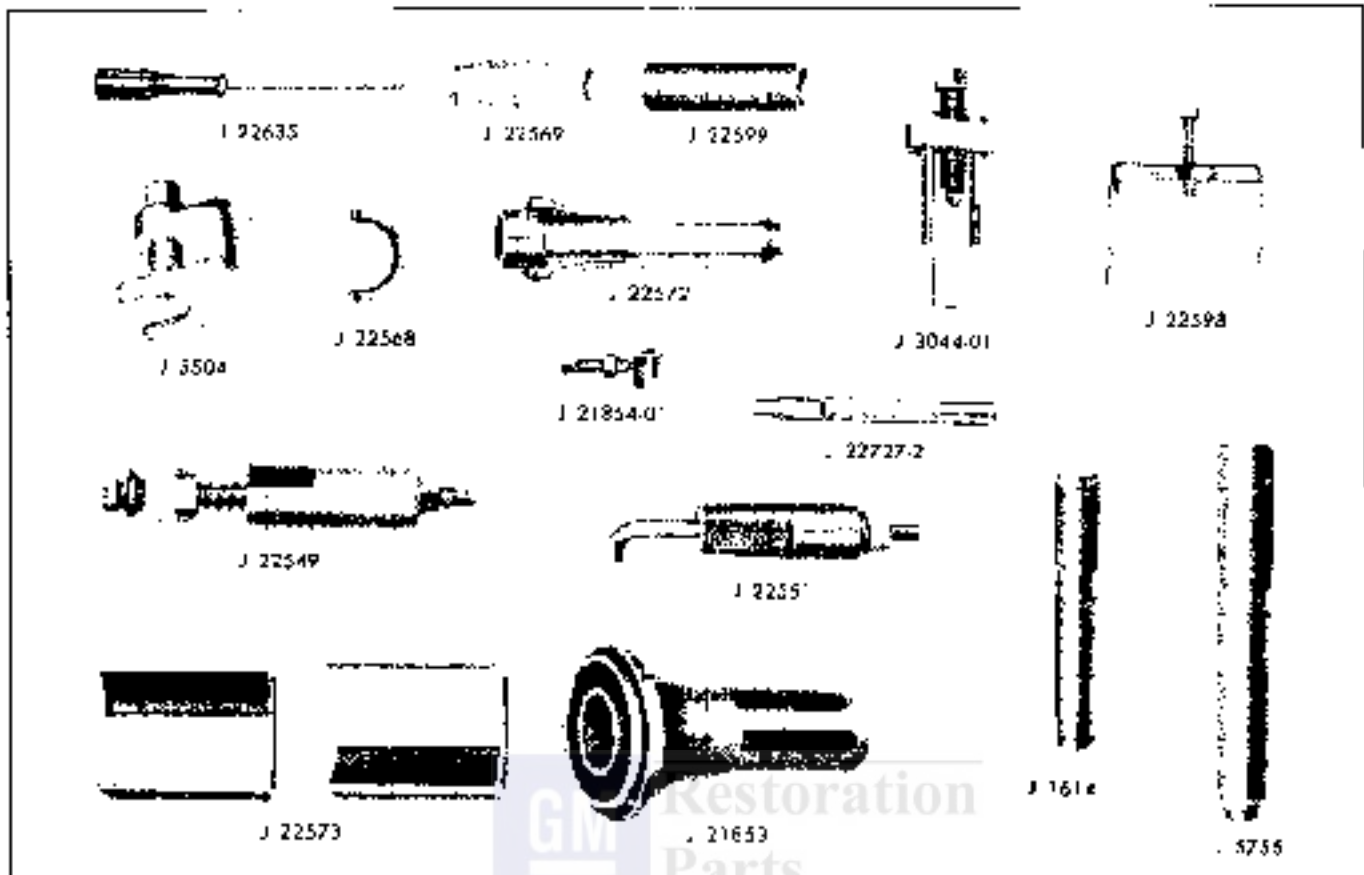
Special Tools for Steering Columns use Standard Steering Gear
